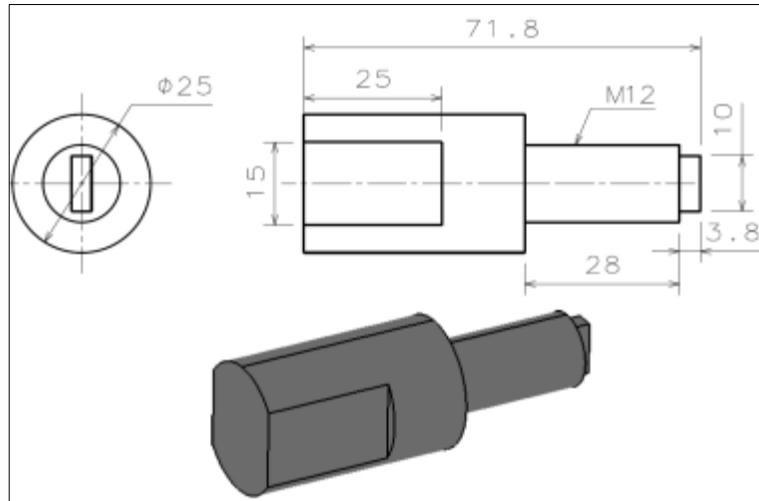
Three-dimensional model of shoulder-milling machine interconnection part
